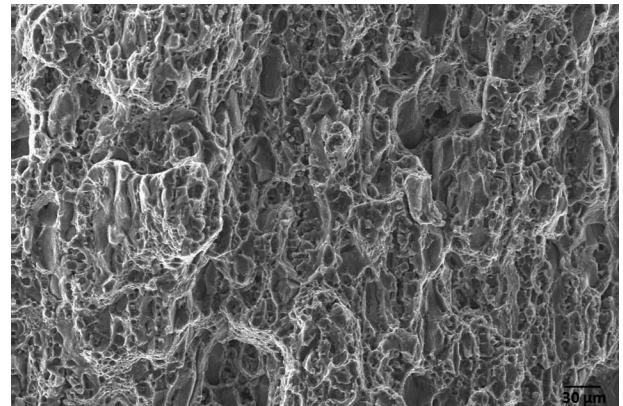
Fracture surface of a room temperature tensile-tested specimen of AA 2219 in T87 condition for a sheet of 8mm thickness. The specimen was in the longitudinal direction
